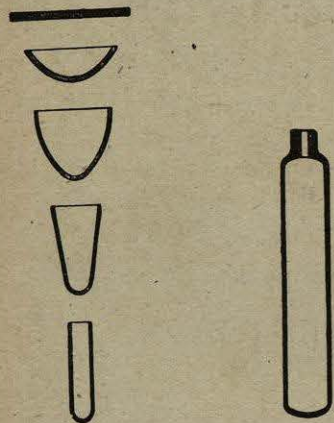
Successive Stages in Forming a Weldless Tube from a Steel Sheet.
